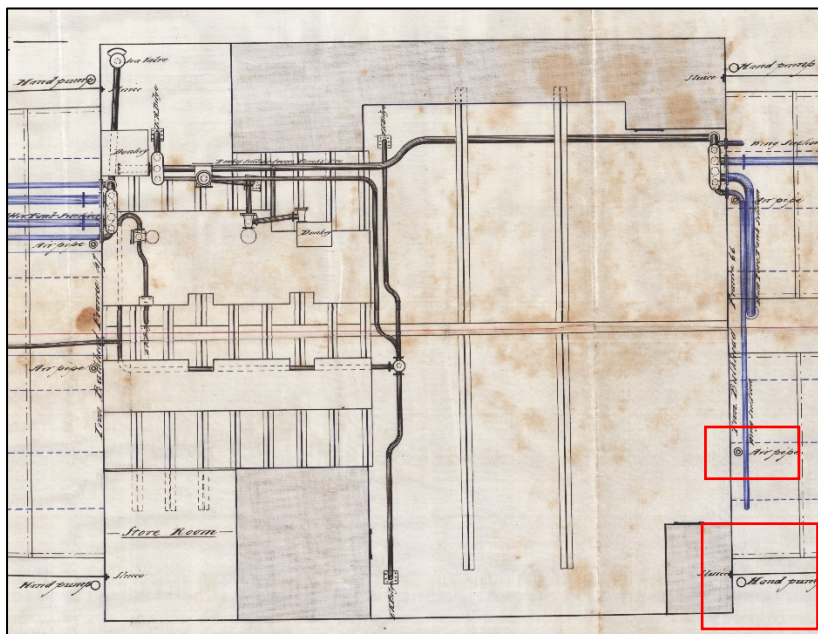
Location of hand pump, sluice and airpipe forward of bridge bulkhead area in a piping plan of the vessel (Image: LRF 1879 (#LRF-PUN-STK902-0133-P_0001))
